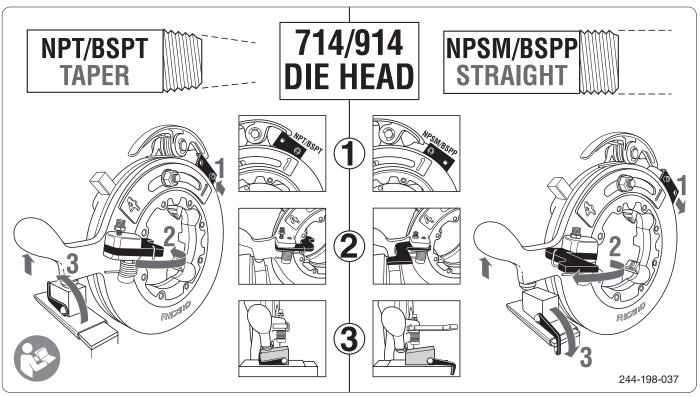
Adjusting for Tapered or Straight Pipe Threads
